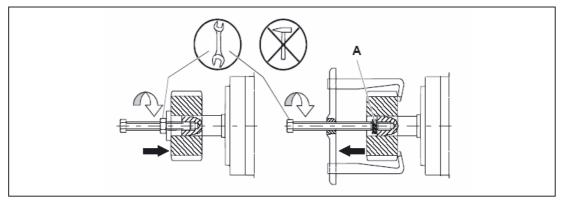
Fitting and removing output elements; A = washer (for maintaining the centering in the shaft extension)
